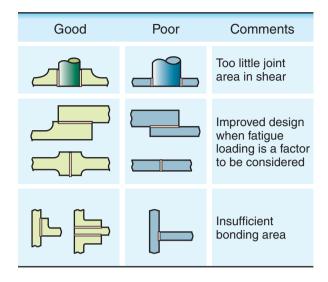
Examples of good and poor designs for brazing. Source: American Welding Society.
